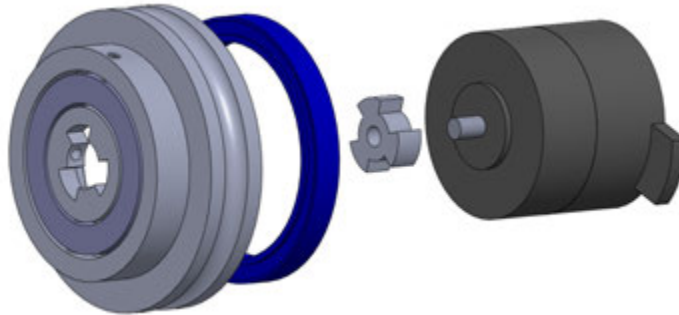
exploded view of in wheel drive mechanism showing (from left to right) wheel with rotational decoupling, bearing, linear decoupling and motor
